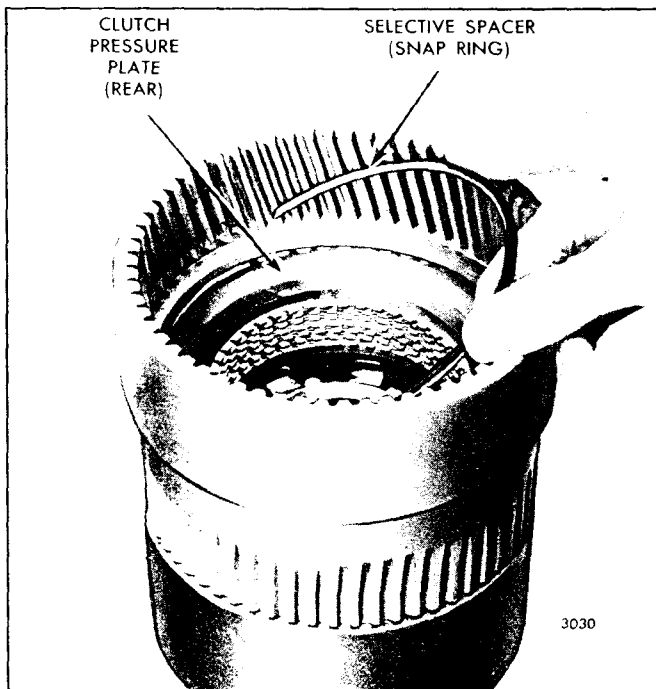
Installing Forward Clutch Selective Spacer (Snap Ring) in Ring Gear
